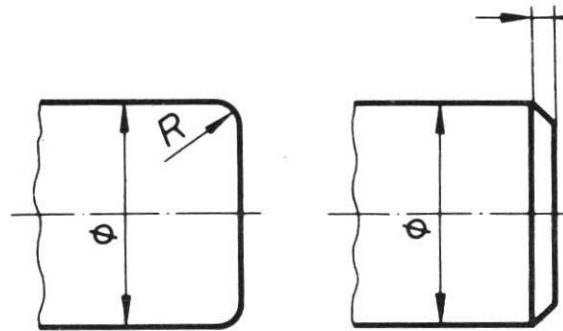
The end corner of a shaft should be ended to a chamfer instead of a fillet.
